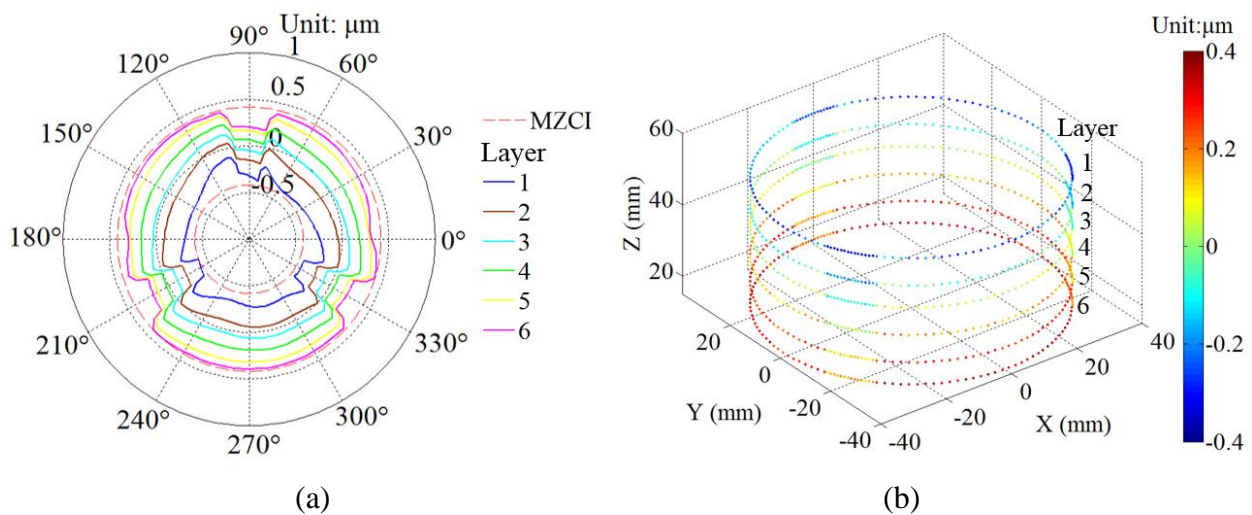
Result of workpiece deformation due to cutting force along six CMM layers ($0.8 \mu\text{m}$ cylindricity): (a) top view and (b) perspective view of radial deviation from mean MZCY.
